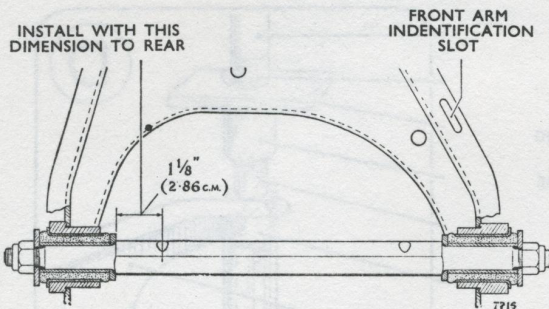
Sectional view of link bushes showing correct method of fitting fulcrum pin
